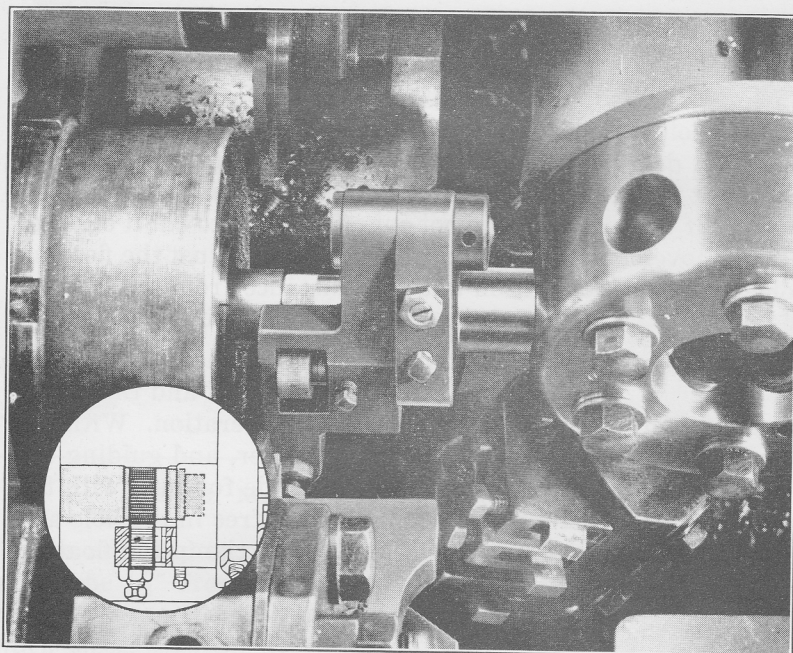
Knurling Swing Tool held in turret and operated by the cross slide
